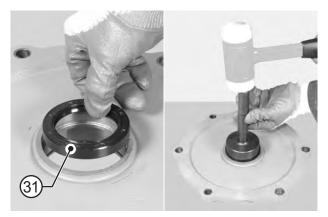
Lubricate the sealing ring (31) and install into the cover (35).
